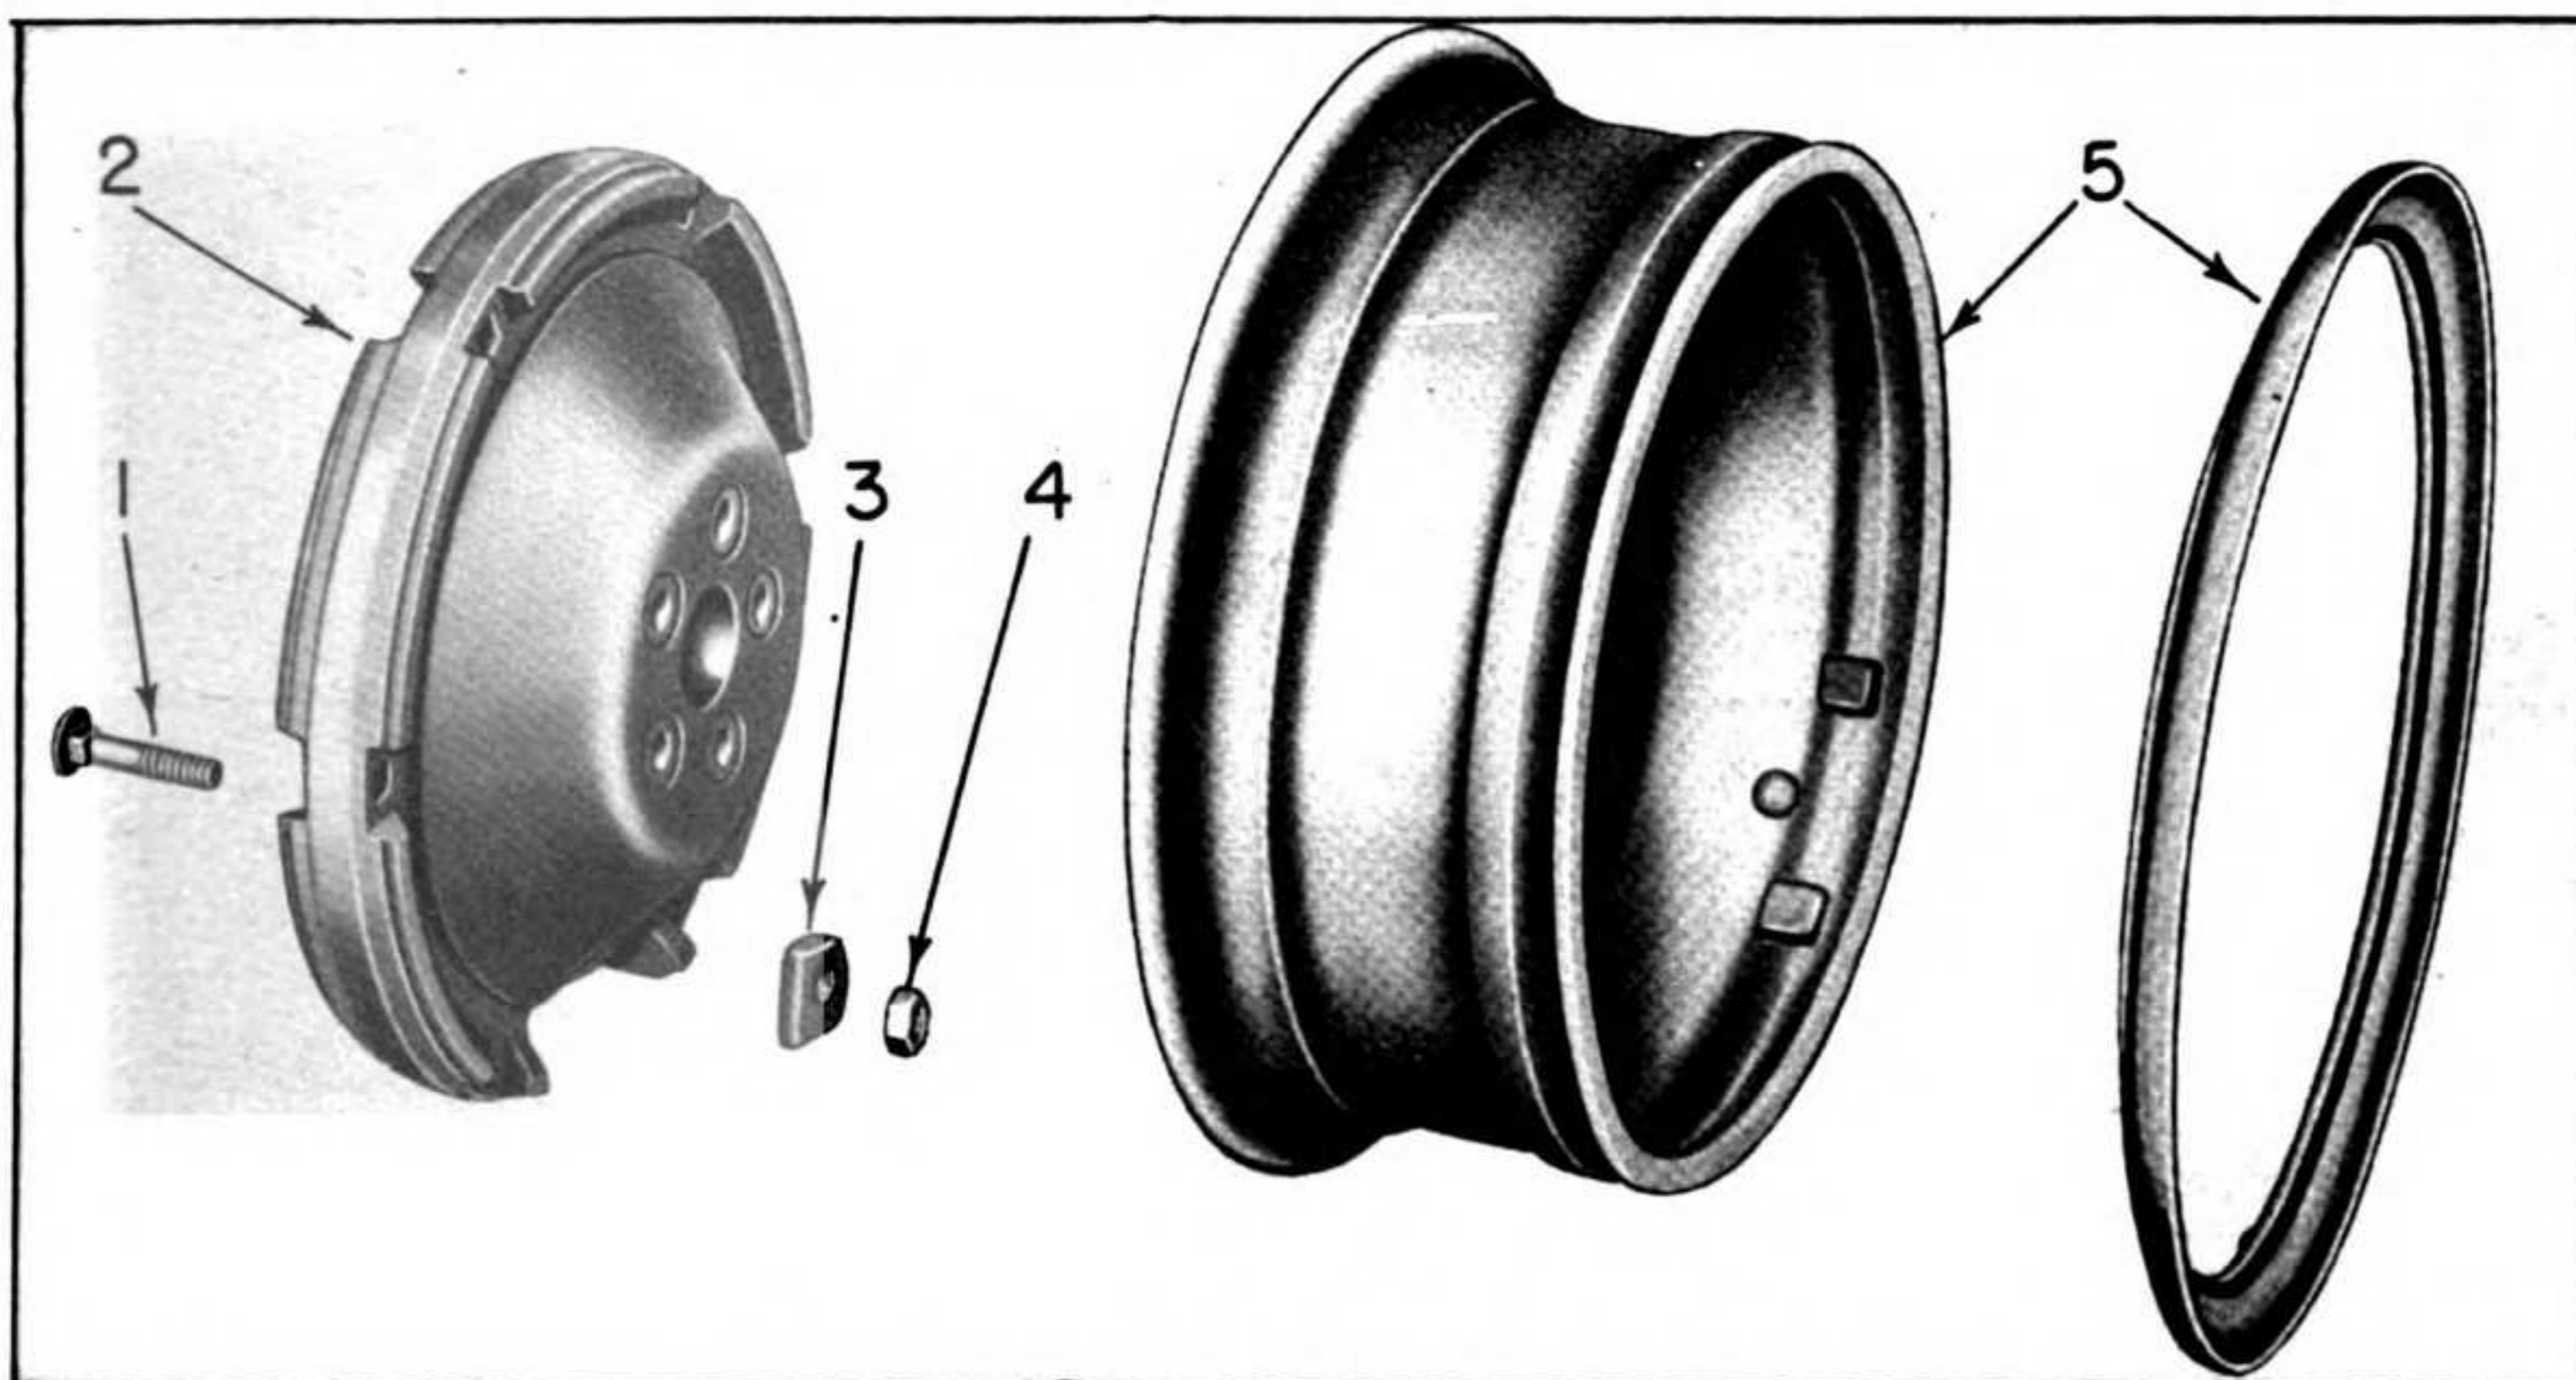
1302 REAR WHEEL AND RIM
